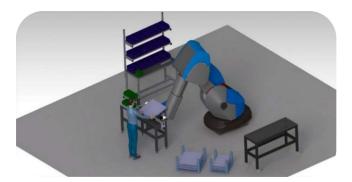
Elevators cabin assembly - SHERLOCK vision.
